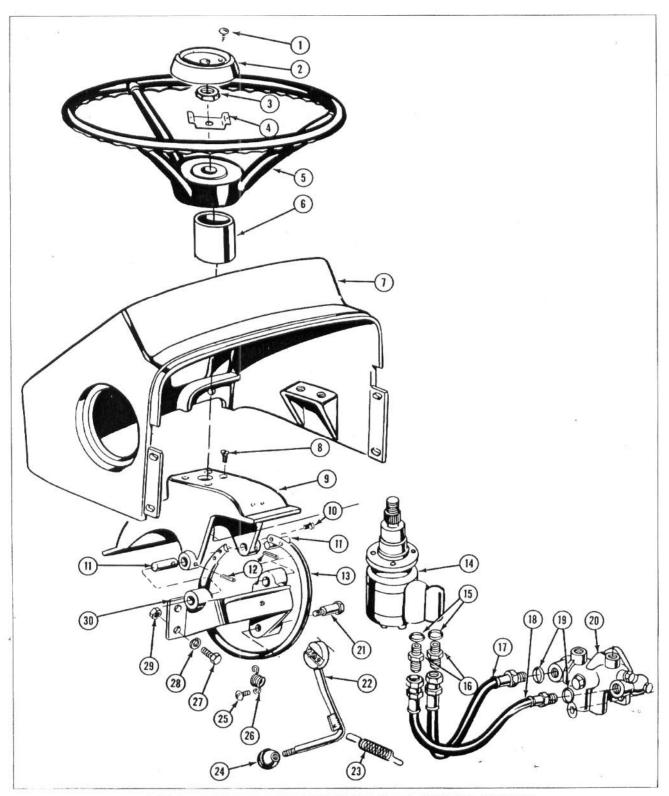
EXPLODED VIEW OF STEERING WHEEL AND PIVOT HOUSING
